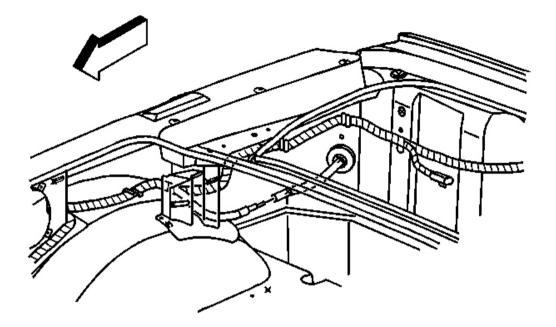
Front Body Wiring Harness At Rear Compartment Side Wall Courtesy of GENERAL MOTORS CORP.
